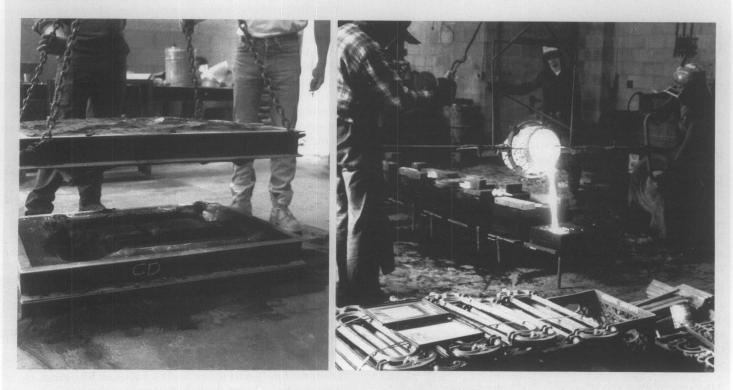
(a) A two-part mold, consisting of a cope (top) and drag (bottom) for a newel post. Photo: Architectural Iron Company, Inc. (b) Molten iron being poured into a mold containing sand at a foundry. The iron casting process has changed little in the past two centuries. Photo: Karen Huebner.
